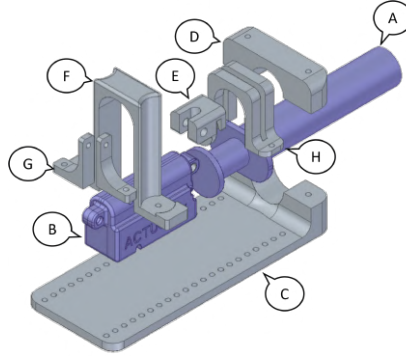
An exploded CAD view of the pneumatic actuation system. The syringe is indicated with (A), the linear actuator with (B), while (C) is the multi-holes base of the device. (D) connects the syringe with the base, (E) interlocks actuator with plunger, (F) and (G) hold the motor, and (H) avoids the motion of syringe shirt.
